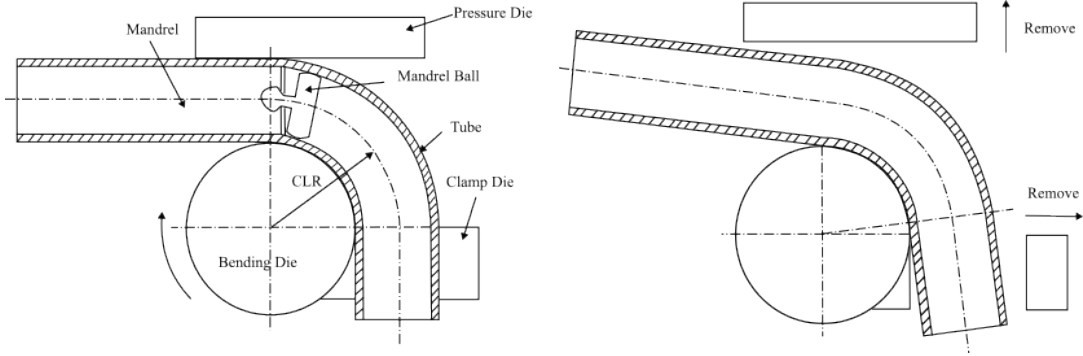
Representation of springback when bending a tube with RDB, adapted from [8].
